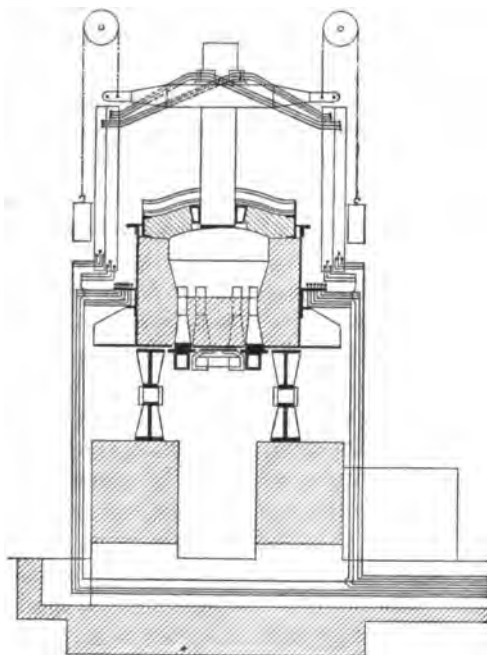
Elevation of 2.5-ton, single-phase Girod steel furnace showing arrangement of conductors.
